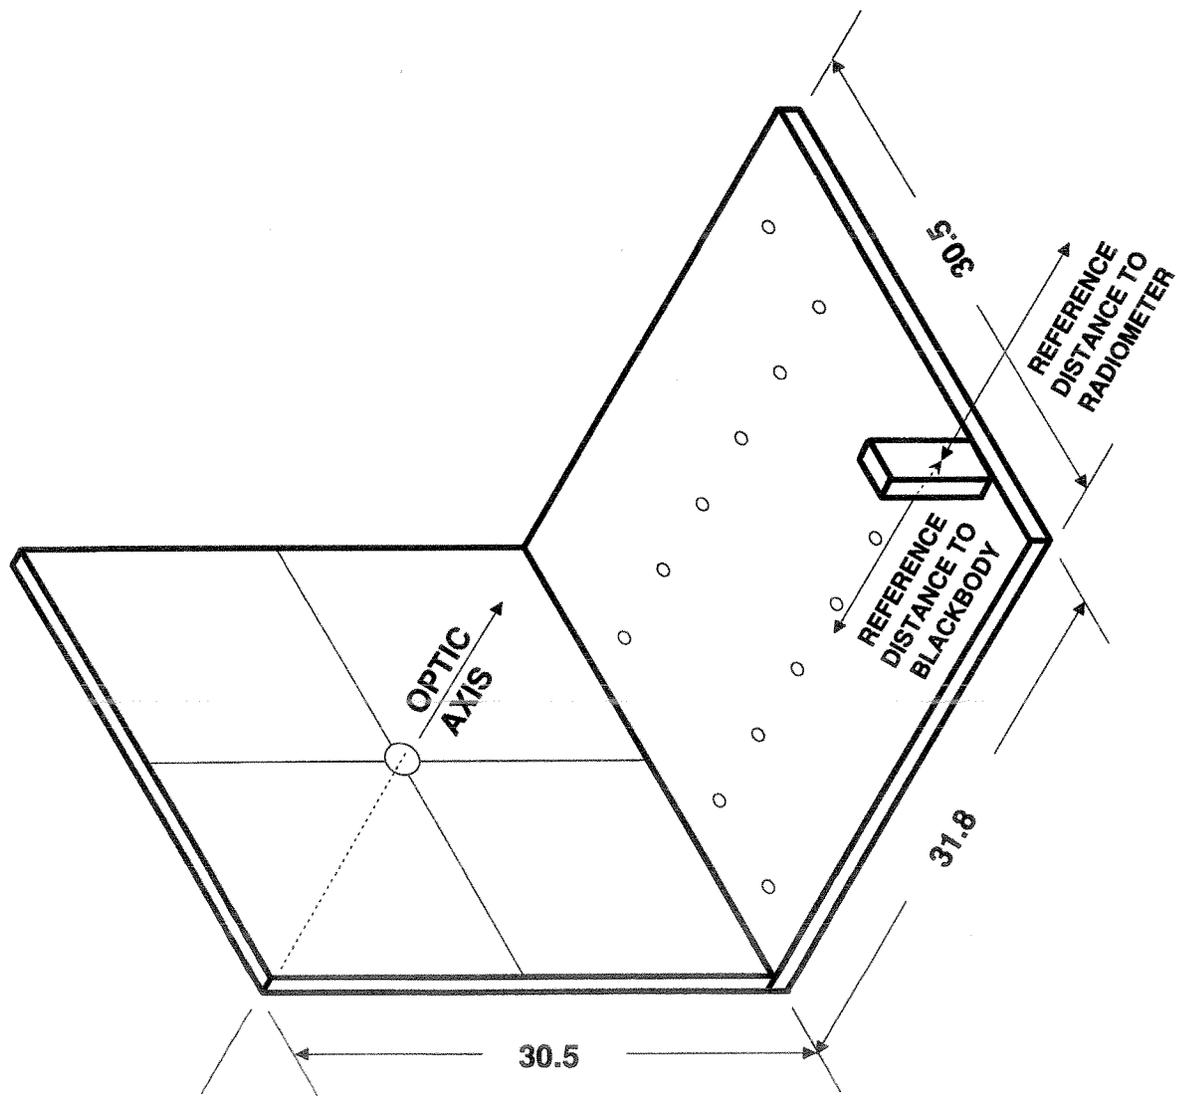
BLACKBODY MOUNTING PLATE (Dimensions in cm)
